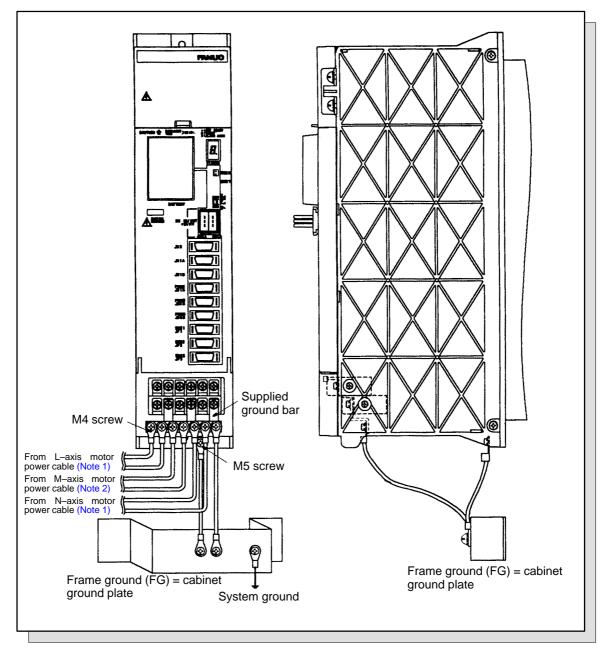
(j) Ground Cable Connection (SVM3)
